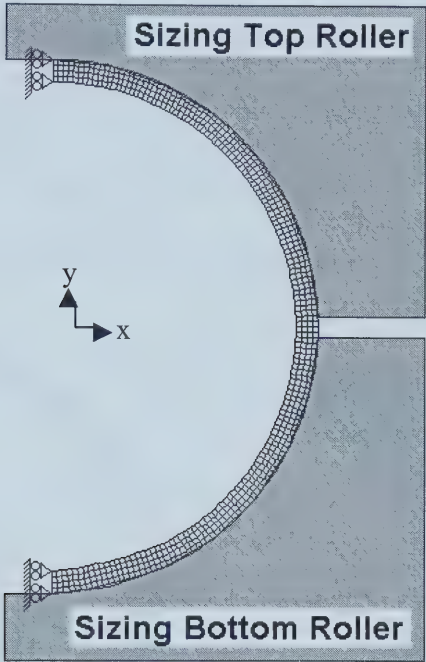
Deformation of skelp through weld loss and sizing.
